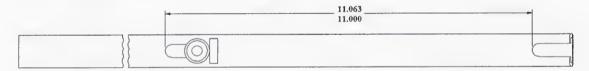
Keyway dimensions – typical for low and high beam assemblies
